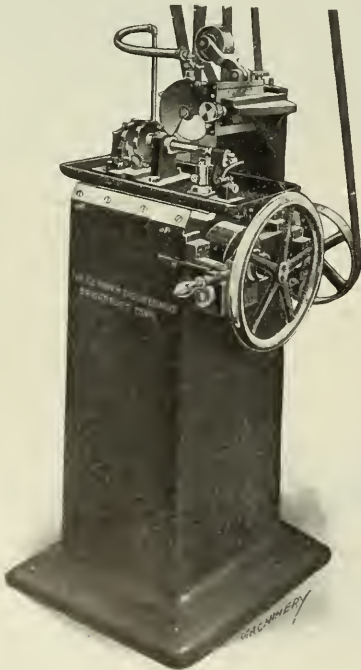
Front View of Harris Automatic Hob Grinding Machine
